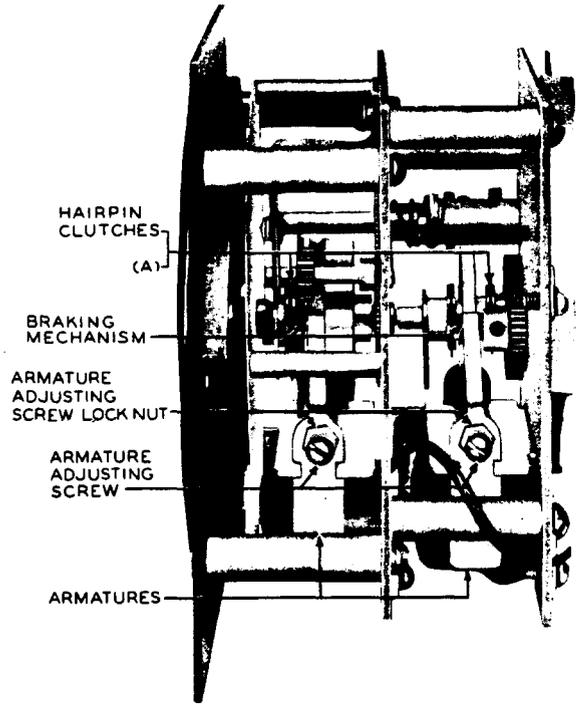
BRAKING AND CLUTCH MECHANISM
